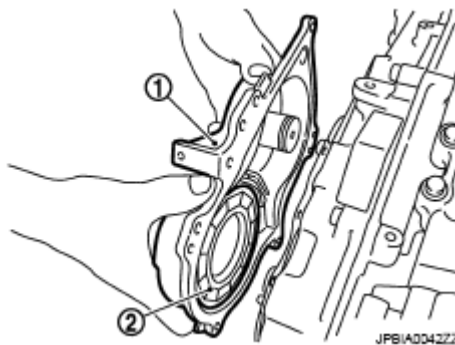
Identifying Magnet Retarder And Open Valve Timing Control Cover
